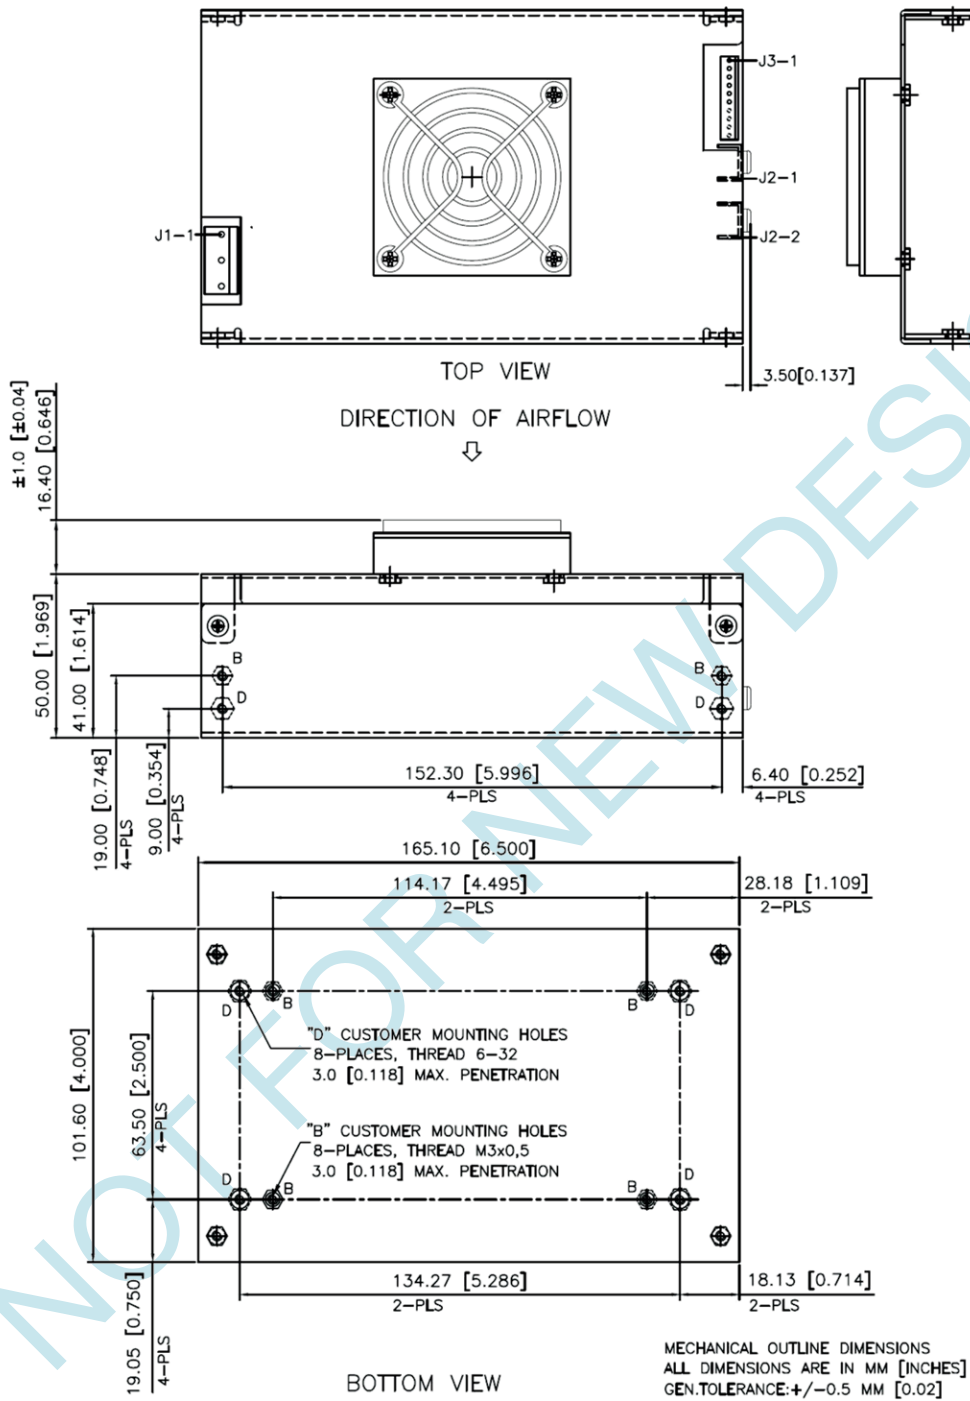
Mechanical Drawing (With Top Fan Mounting)
